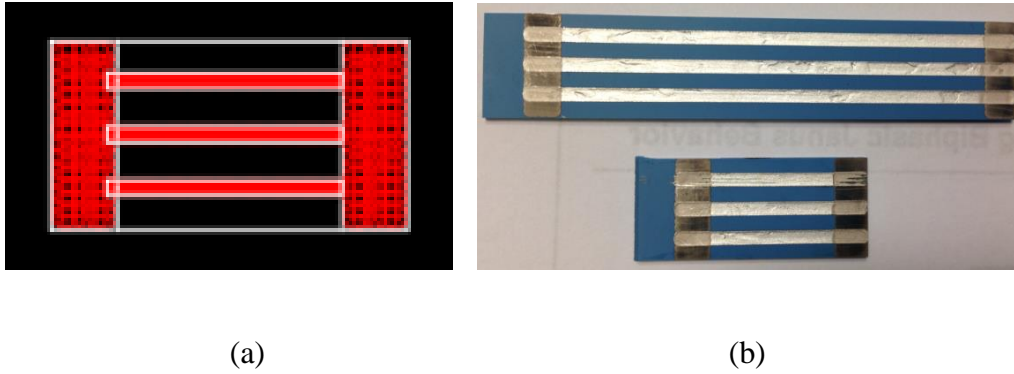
5 (a) Top view of LTCC surface channels; (b) Fabricated LTCC interposer samples with surface channels filled.
